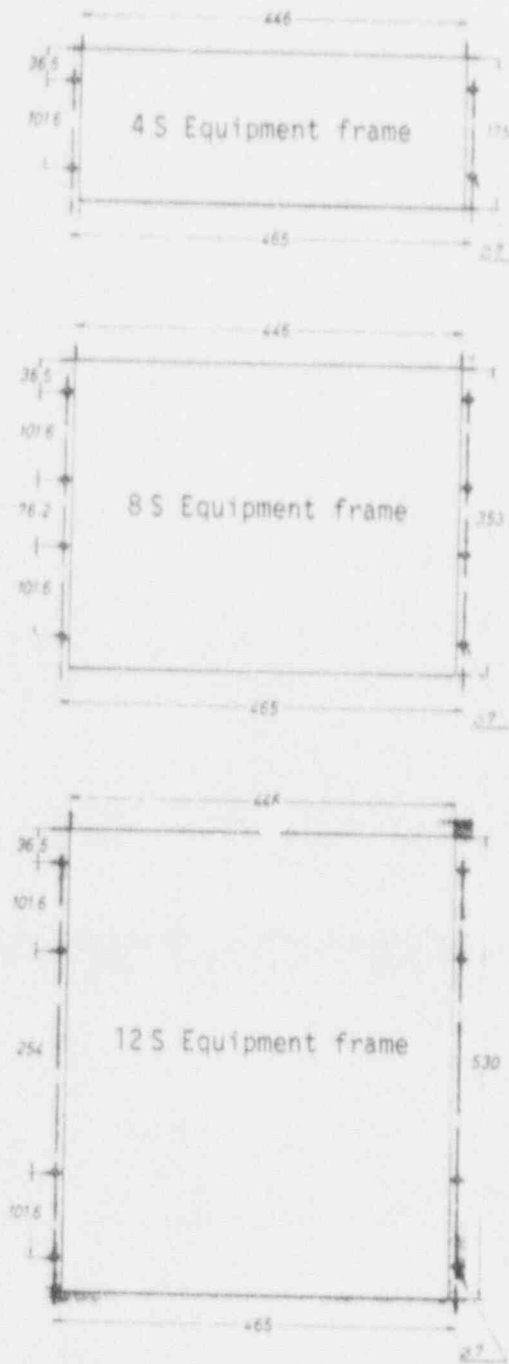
Cutouts and drilling plans for panel-mounted equipment frames (dimensions in mm)
